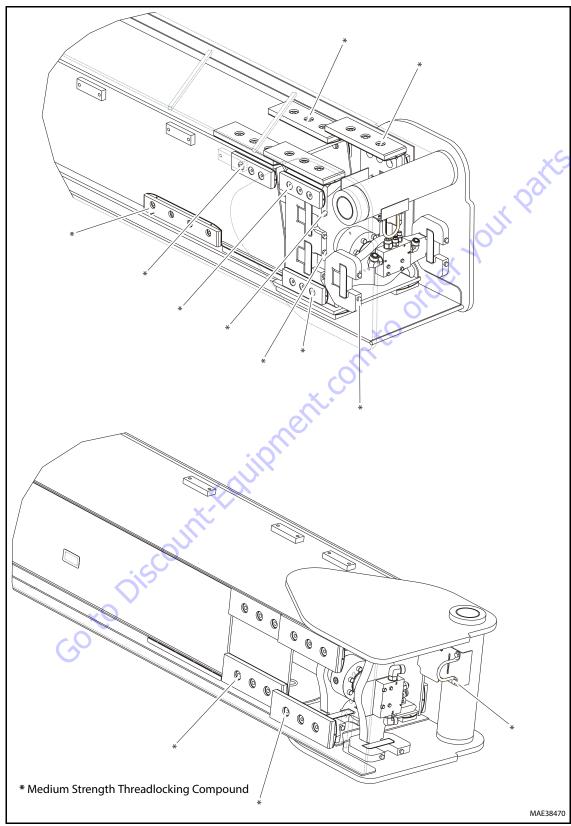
Locations for JLG Threadlocker Application - Sheet 3 of 5
